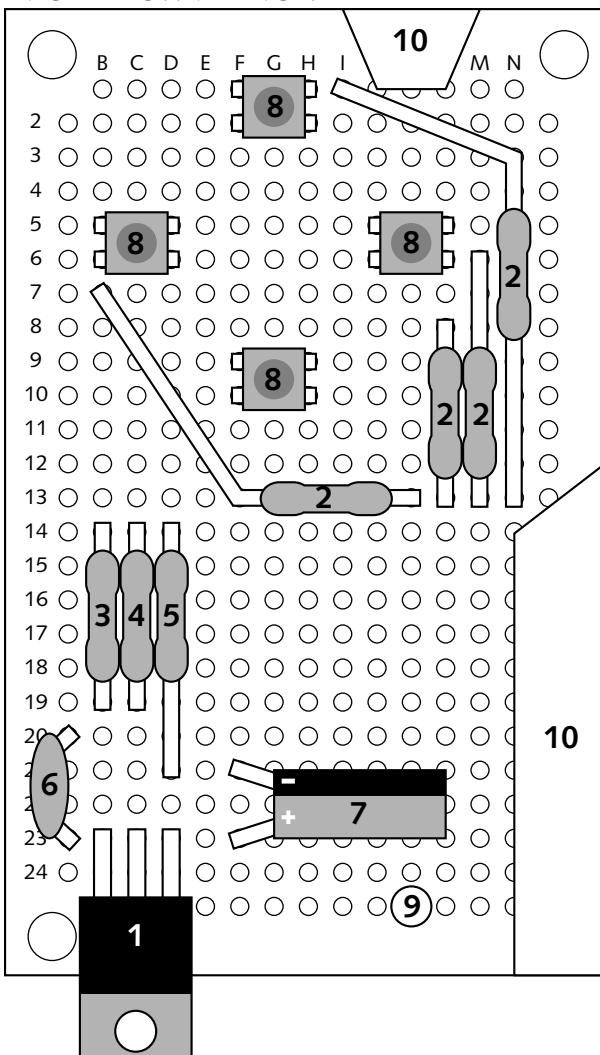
Attaching the heat sink and installing the regulator.
